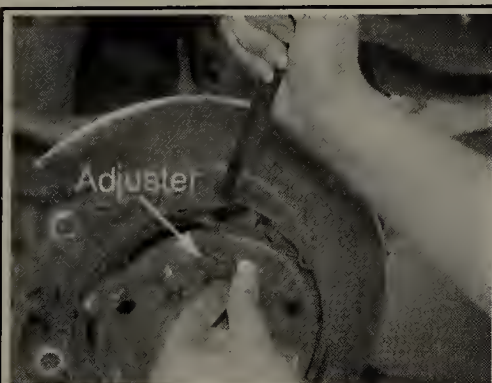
Use a suitable tool to spread the brake shoes, then remove the adjuster assembly
